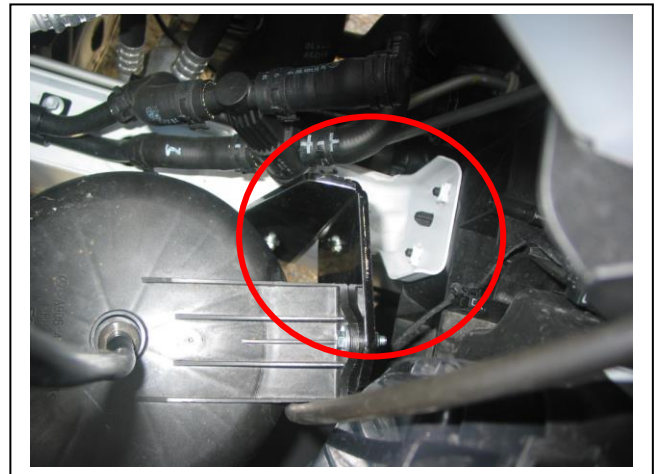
Canister bracket fitted TO DRIVERS SIDE
